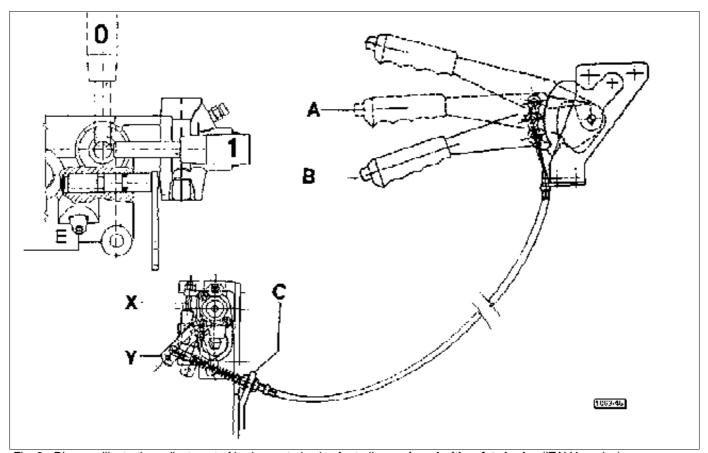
Diagram illustrating adjustment of brake control valve for trailer equipped with safety brake (ITALY version).
